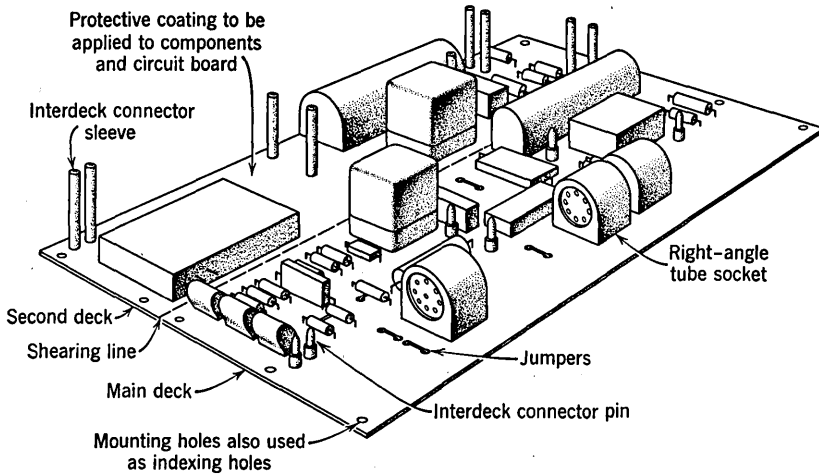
Components installed on flat circuit board, components include delay line package, relays, and right-angle tube sockets
